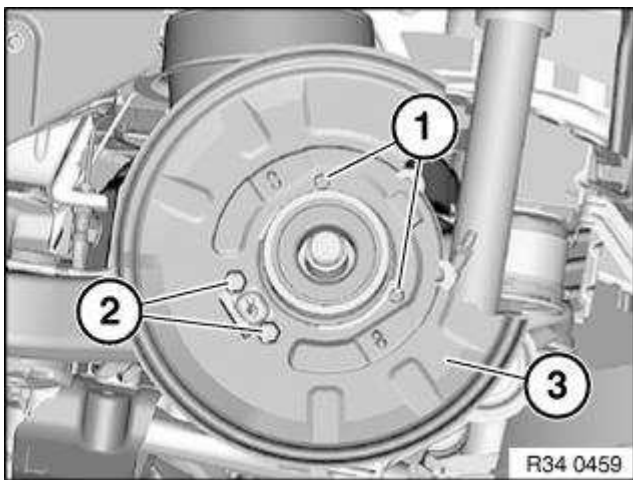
Release Screws (2) And Remove Brake Carrier (3)
